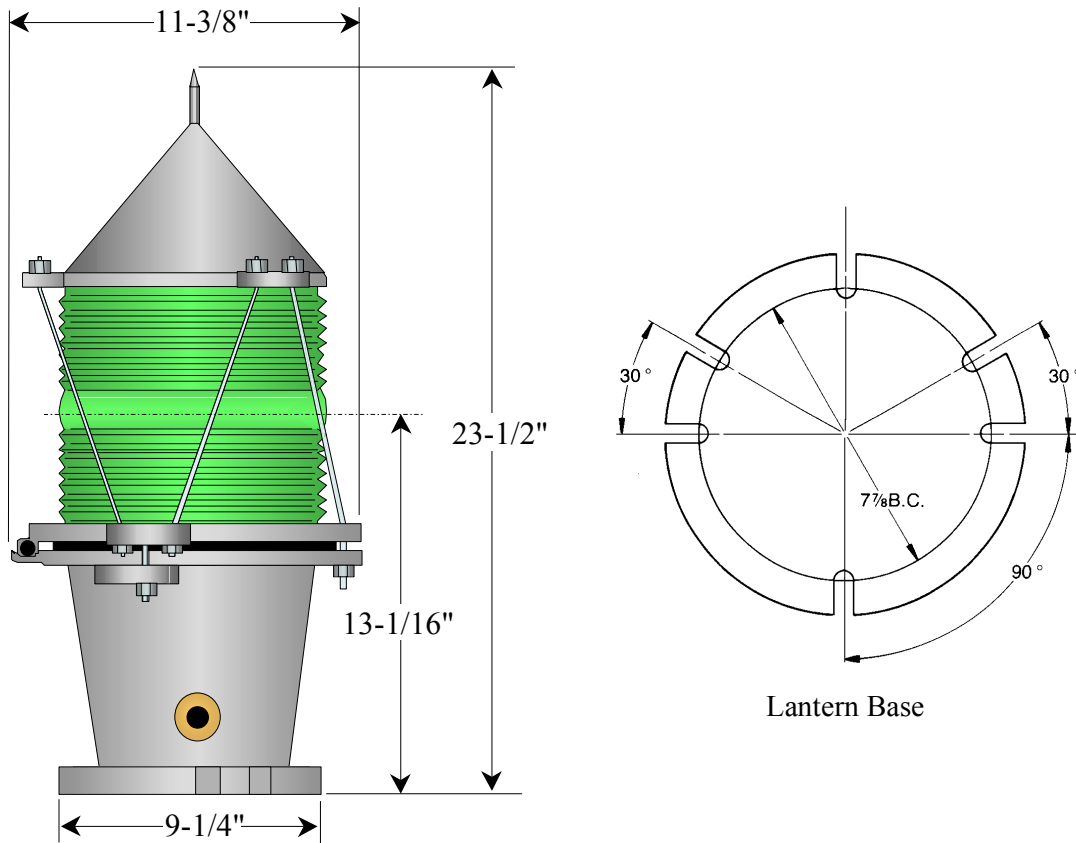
200mm Buoy Lantern Dimensions and Base
